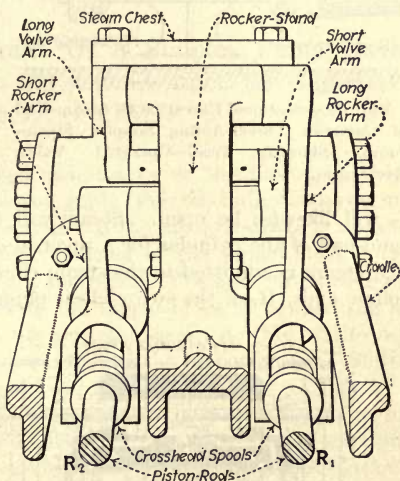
End-View Of Steam-Valve-Actuating-Mechanism Of Duplex Pump.
